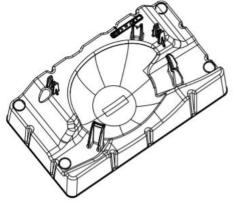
Technical drawing of the evaporation tray Source: Authors.
